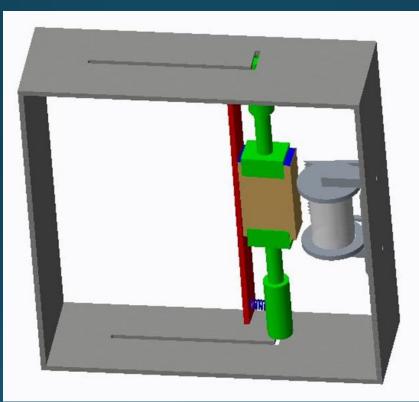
Wrapped capacitor assembly moving backwards to cut tape and finish wrapping process
